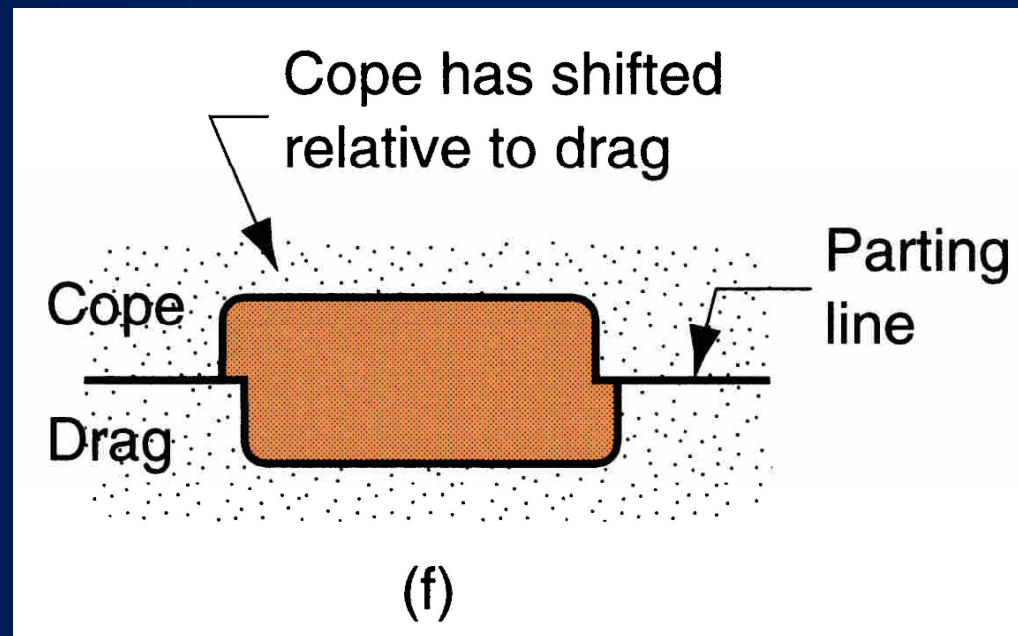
Common defects in sand castings: (f) mold shift
